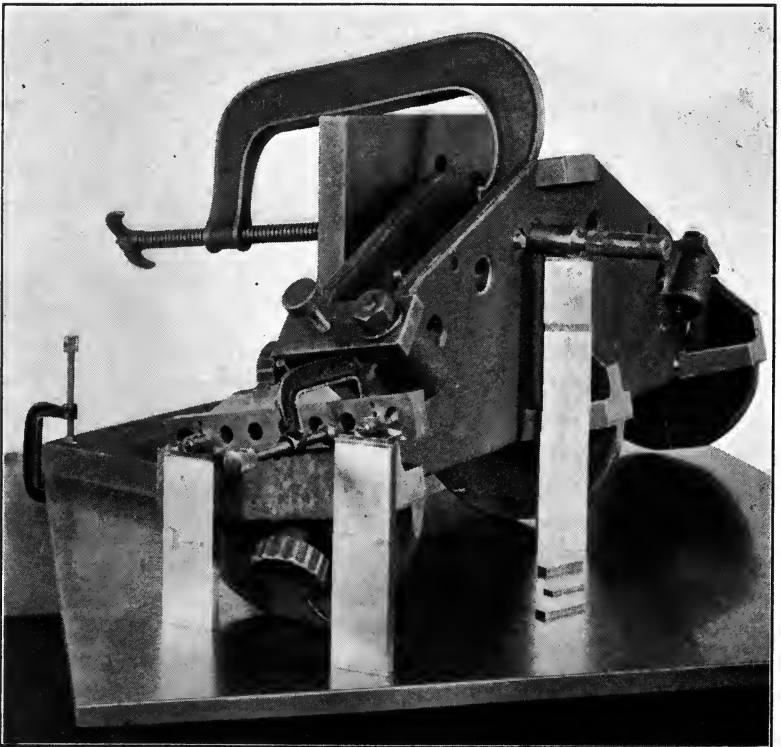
Set-Up of Johansson Blocks to Check Drill Jig
